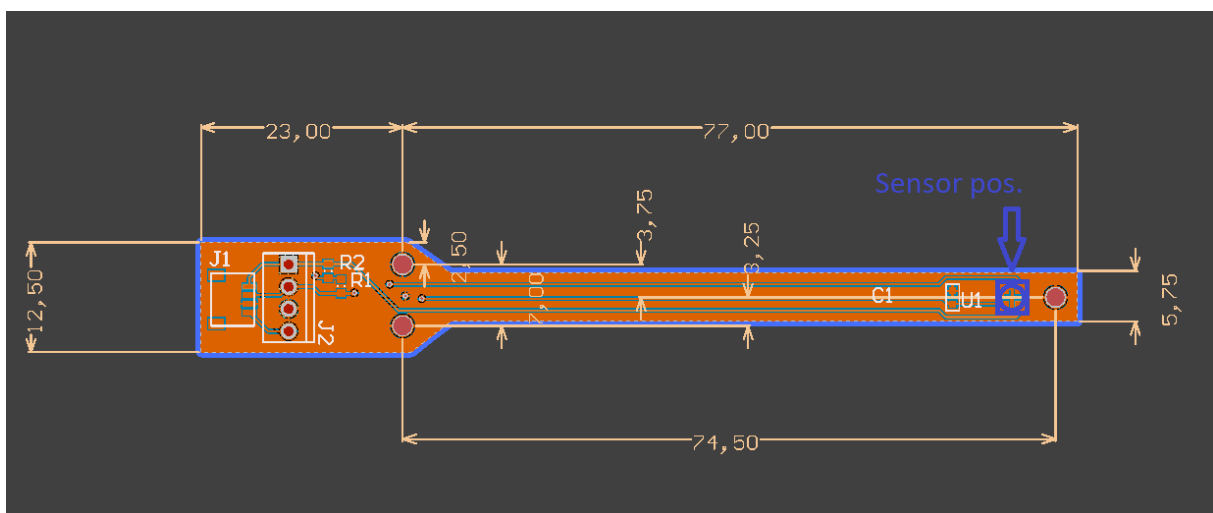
MS5837 board dimensions (mm) Sensor is mounted on blue position at the end of the small part
